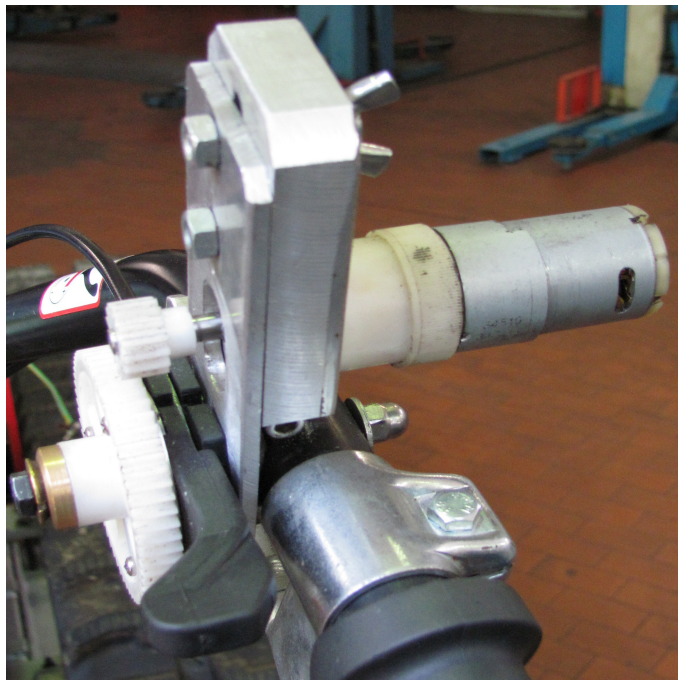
2: The power window 12V motor adapted to the throttle cable.
